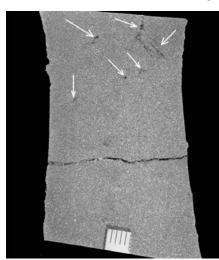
Macrostructure of the weld of joint S1 in the crack zone. The arrows indicate the location of gas pores in the weld
